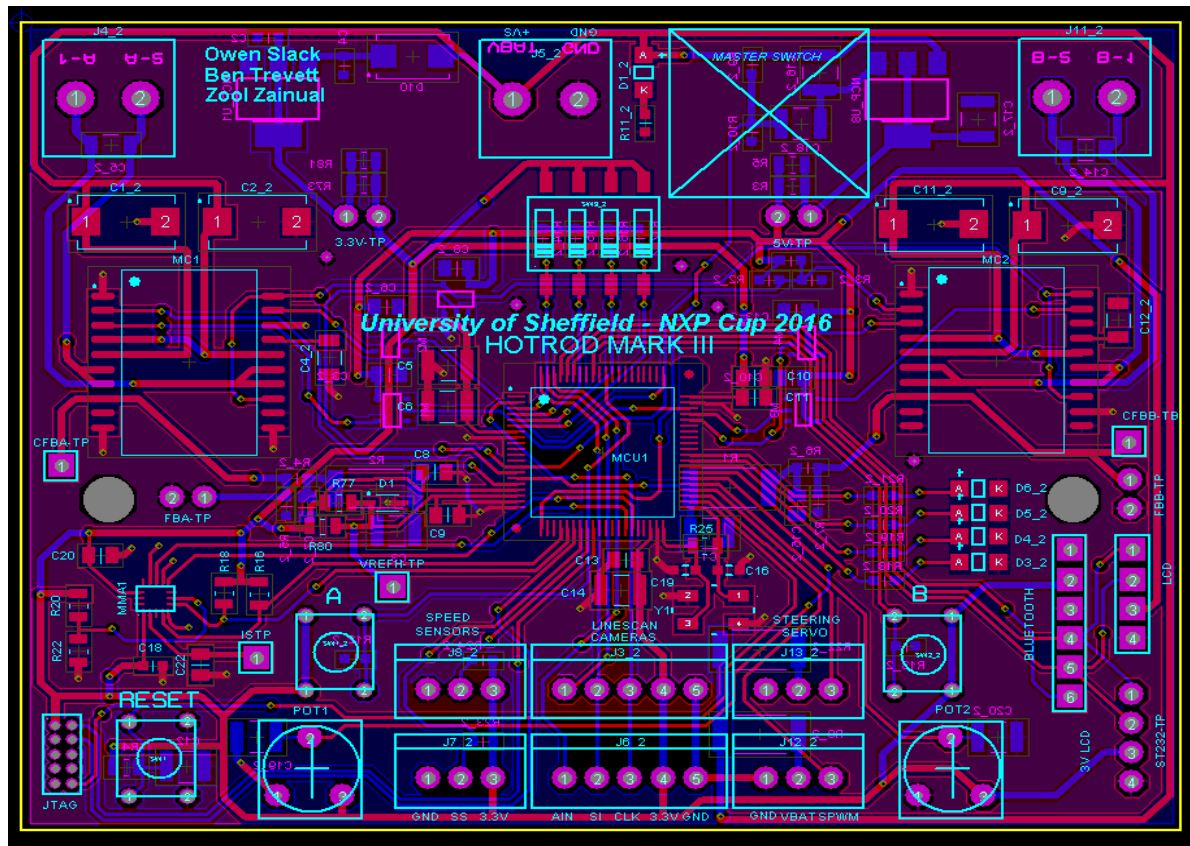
Final PCB Design, Hotrod Mark 3, 2-Layer Layout.
